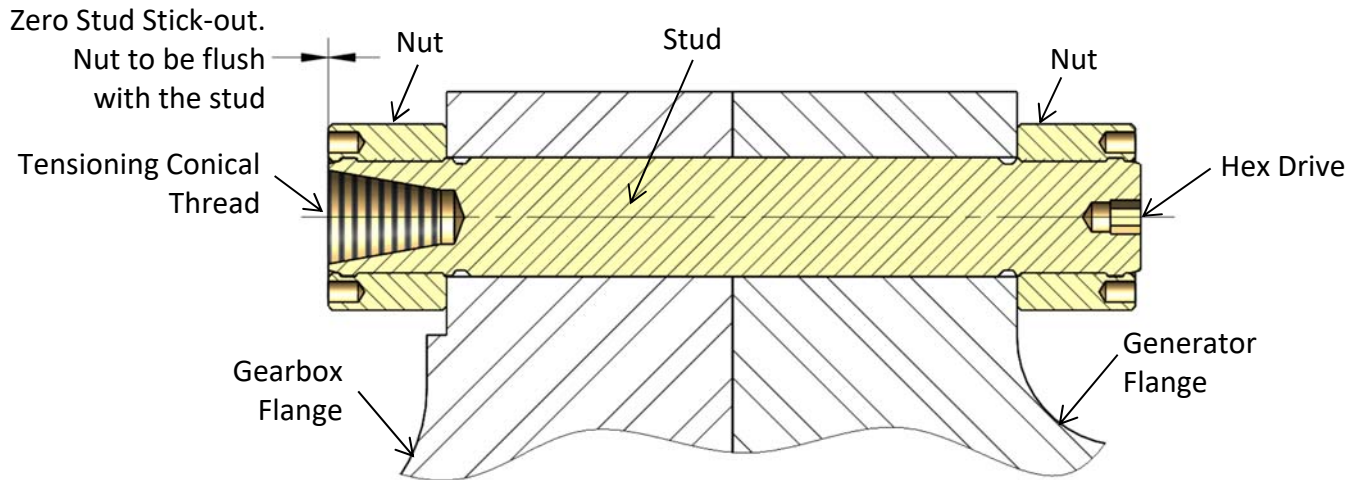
C – Cross-section View of Gearbox to 6A6 or 5A4 Generator Bolted Flange Connection (1-1/4" Hardware)
